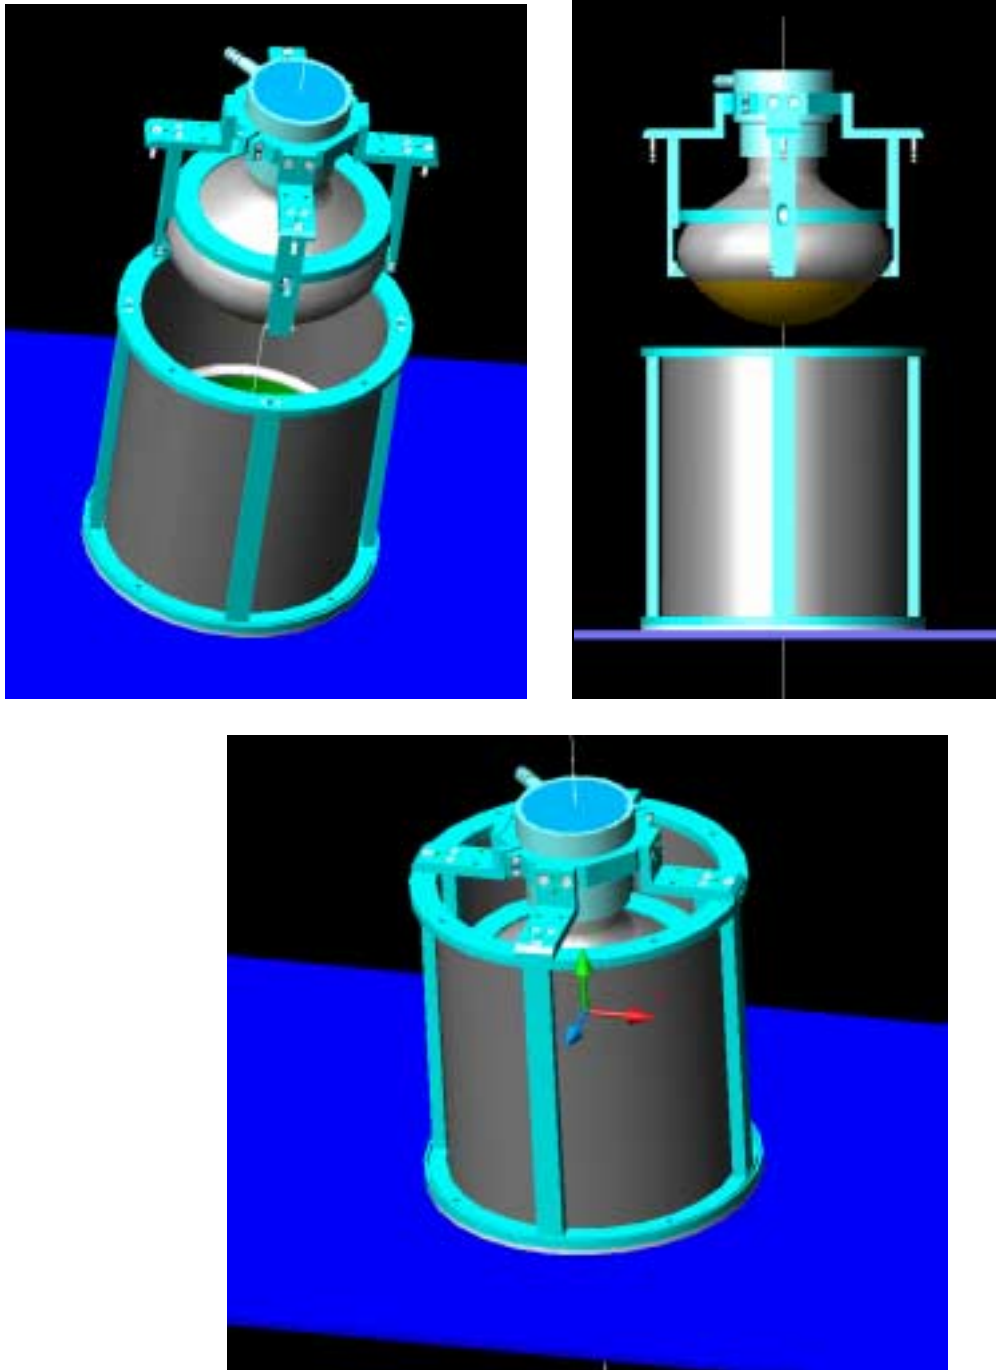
Fig.-49: Final assembly to integrate the mu-metal shield and the light concentrator. After this, the PMT should be ready to be transported to the detector site.
